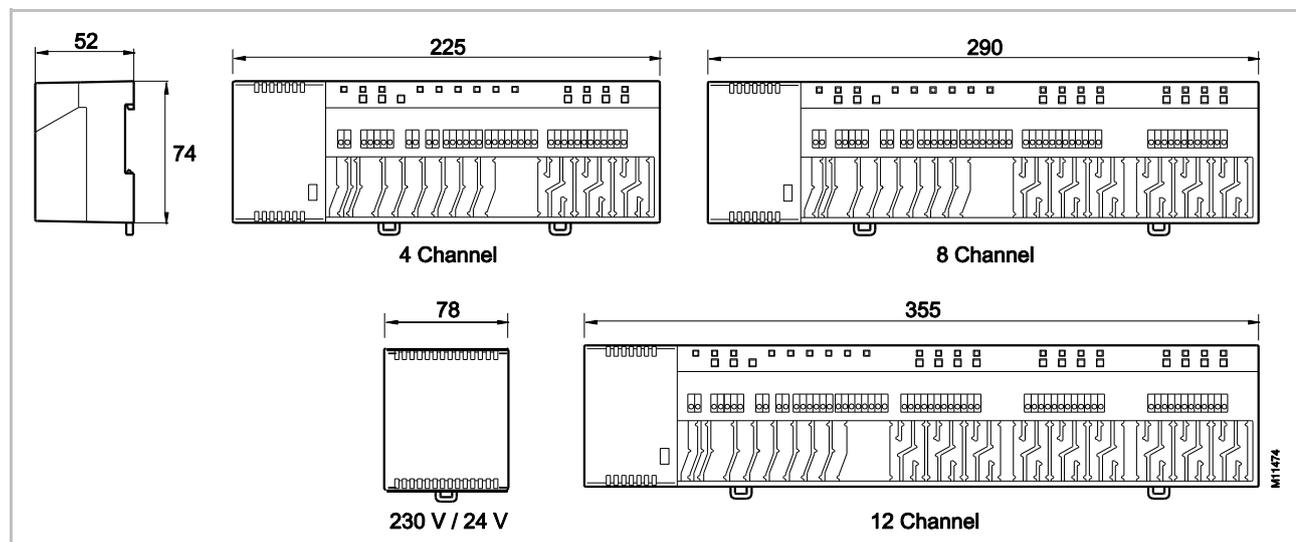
Dimensions wireless connection module 24 V version and 230 V version and transformer for wireless connection module 230 V (all dimensions in mm)
